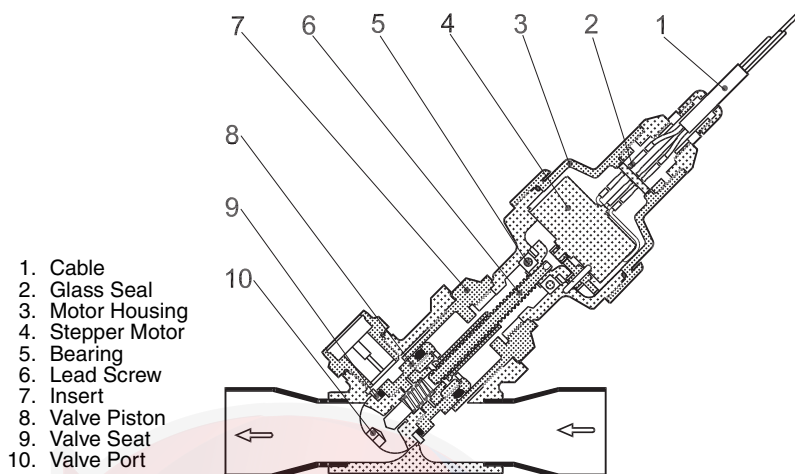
Cutaway Views of the Electronic Expansion Valve
